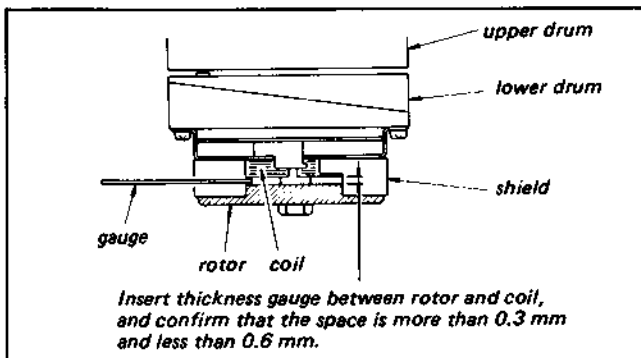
Checking the motor gap width after replacing the drum assembly
